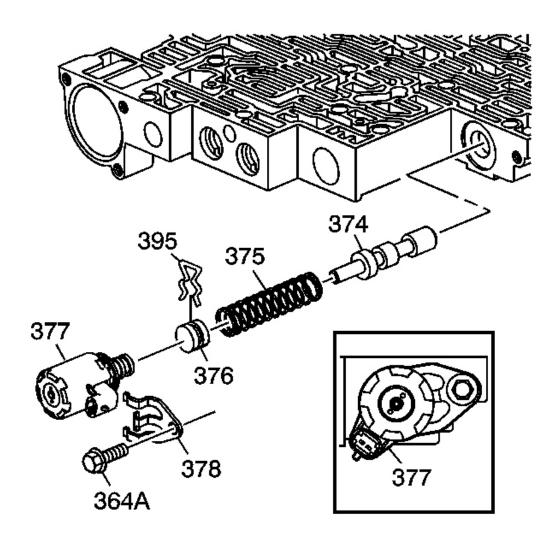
View Of Valve Body Solenoids & Components Courtesy of GENERAL MOTORS CORP.
